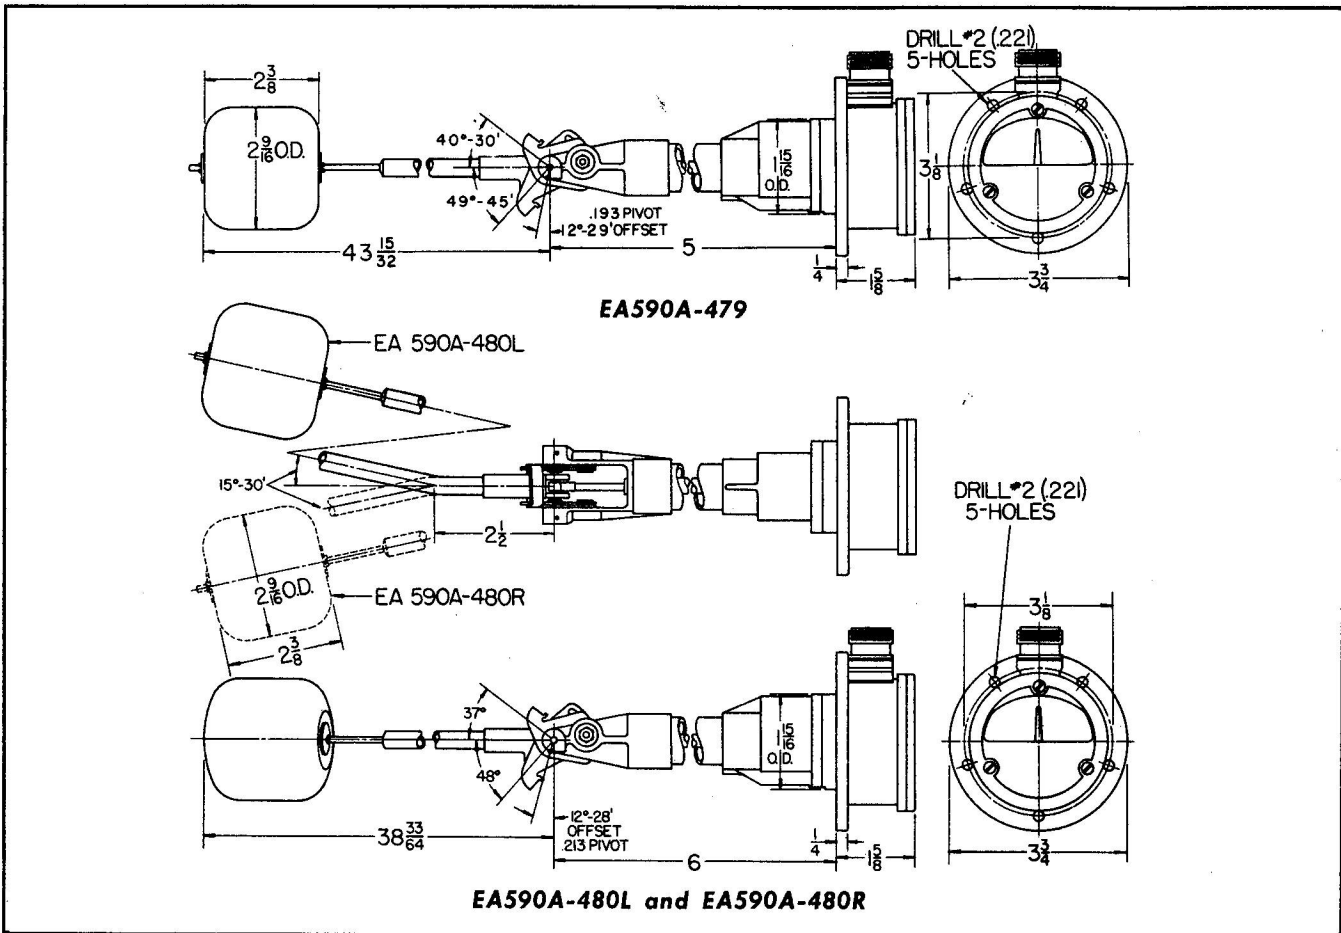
(Sheet 2 of 2 Sheets). General Dimensions
